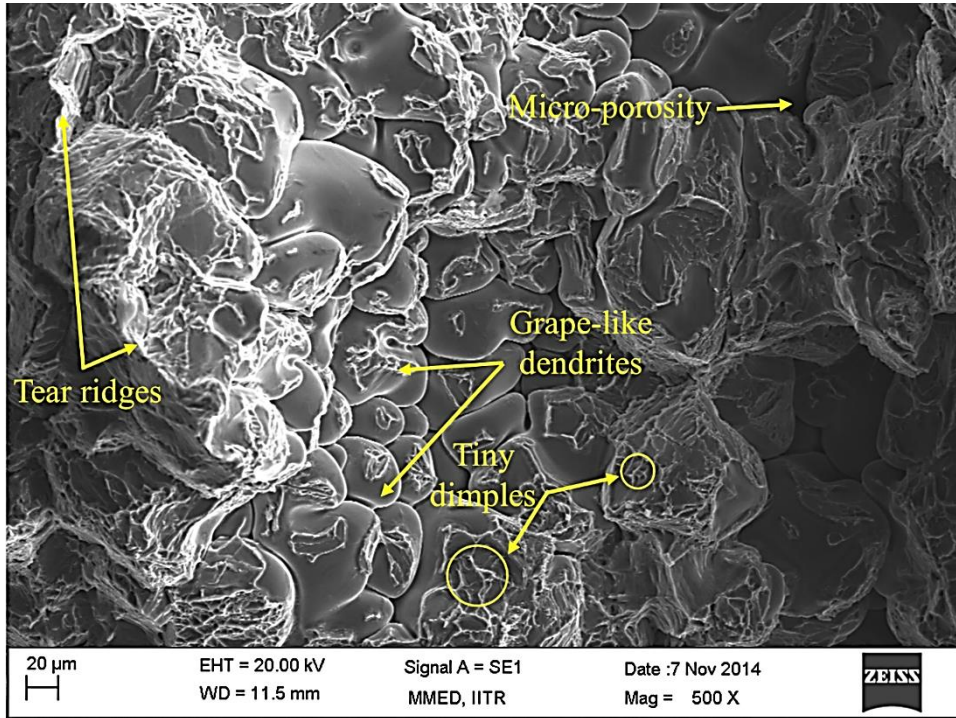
SEM fractograph of the fracture surface of tensile specimen of the as-cast Al6061 alloy.
